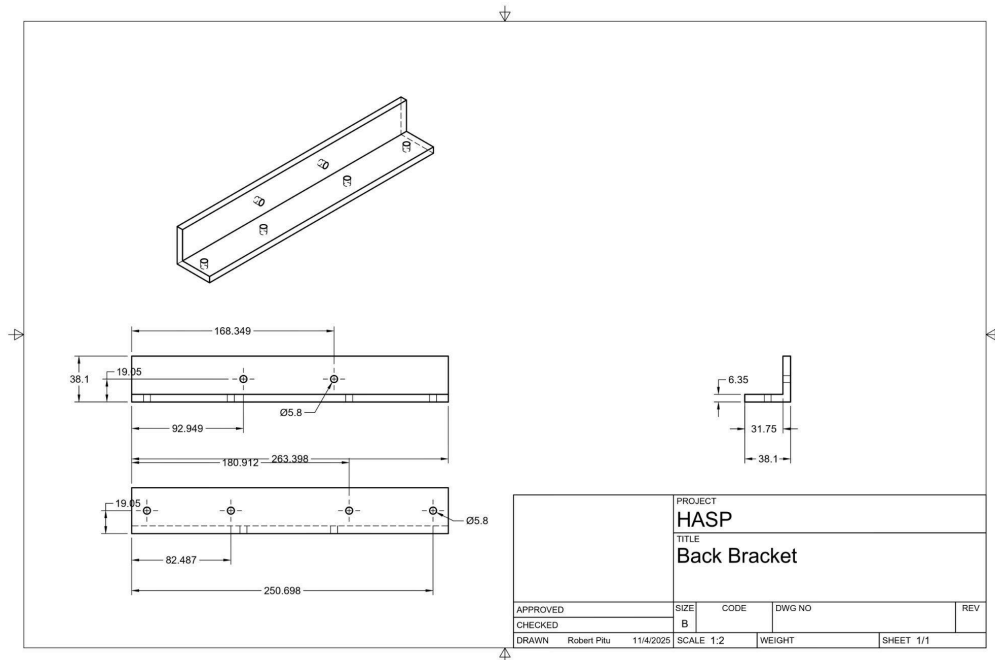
Engineering drawings of the back brackets connecting the vacuum pumps
